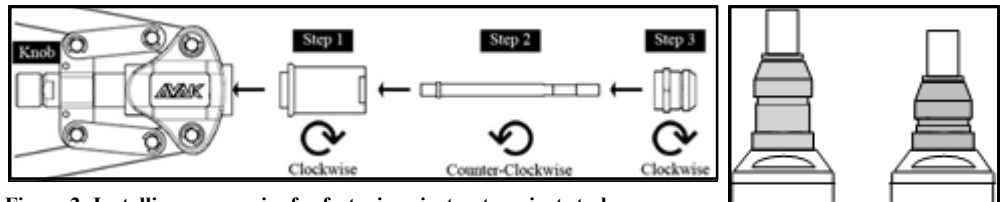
Installing accessories for fastening rivet nut or rivet stud
